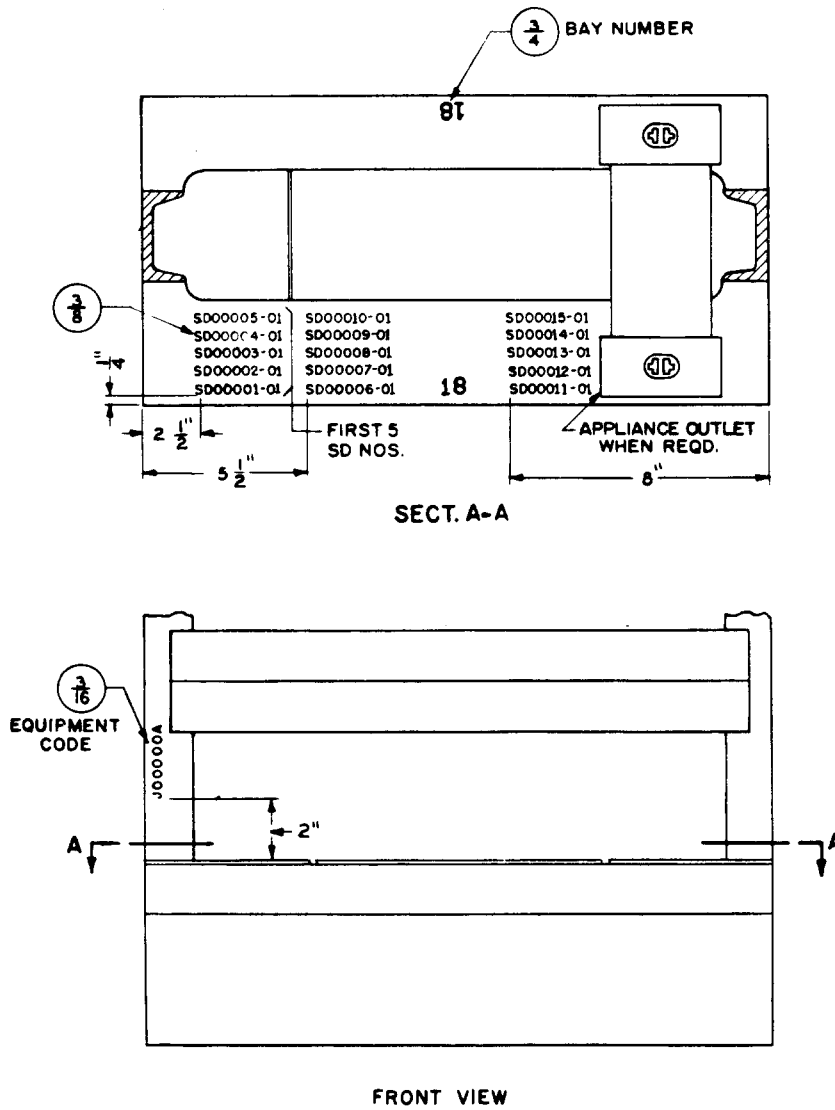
SD Drawing Number and Equipment Code Designation for Frames With Channel-type Uprights and Sheet Metal Base—Single Bay or Left Bay of 2-bay Frame
